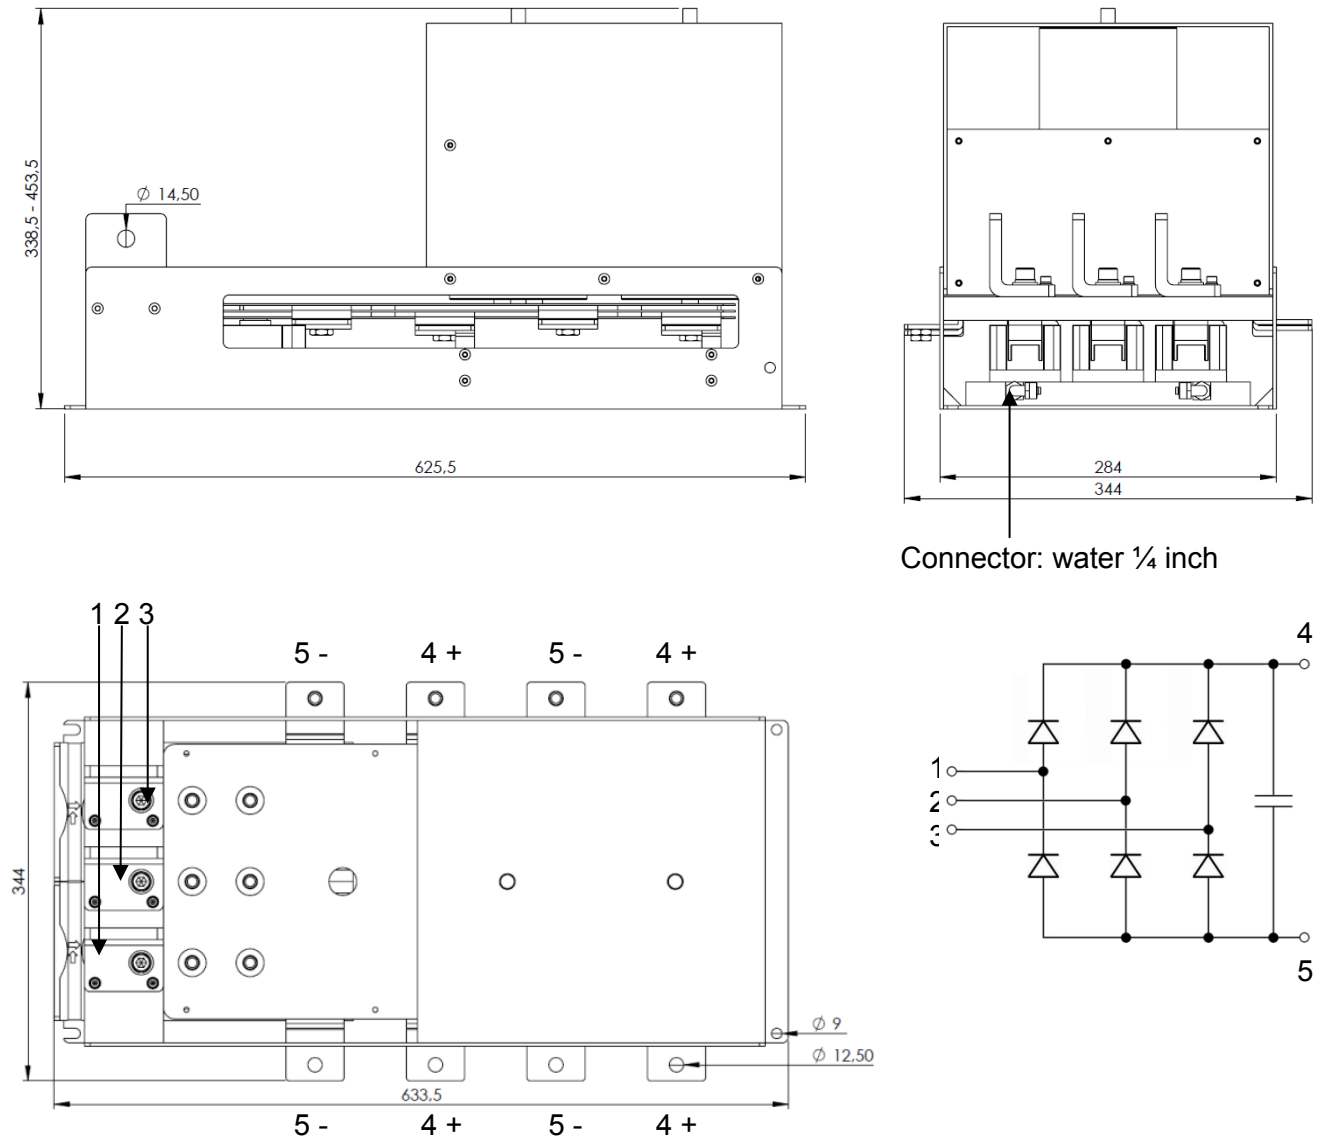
Mechanical drawing of the VARIS™ R-580-U-W (water cooled)
